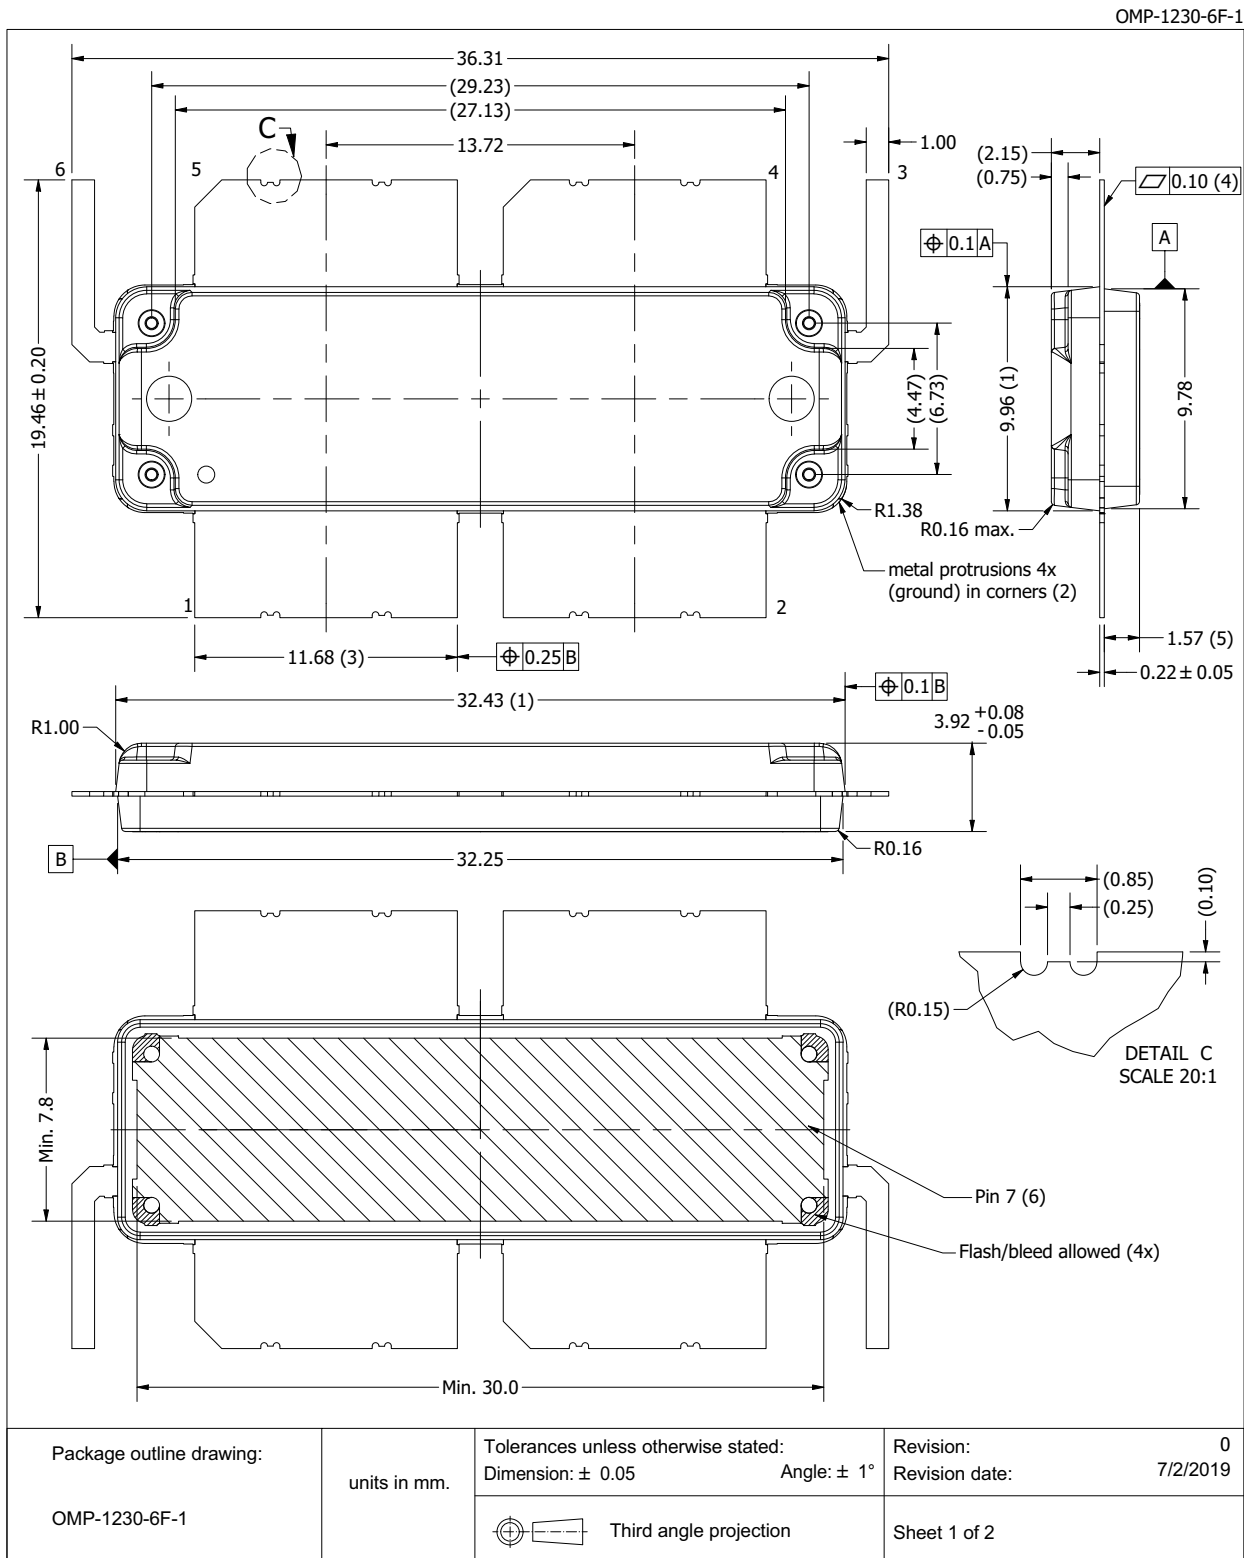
Package outline OMP-1230-6F-1 (sheet 1 of 2)
